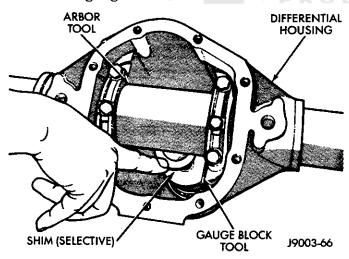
Drive Pinion Gear Shaft Bearing Depth Shim Selection
